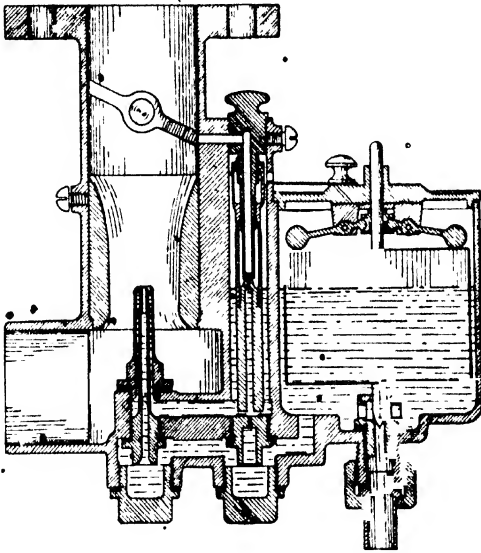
Sectional Arrangement of Zenith Carburettor, showing details of Pilot Jet
